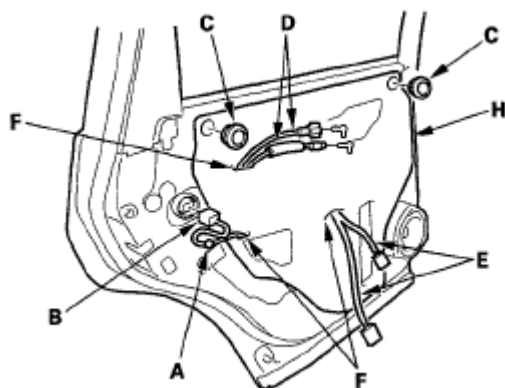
Identifying Harness Clip, Power Door Lock Actuator Connector, Plug Caps And Cables
